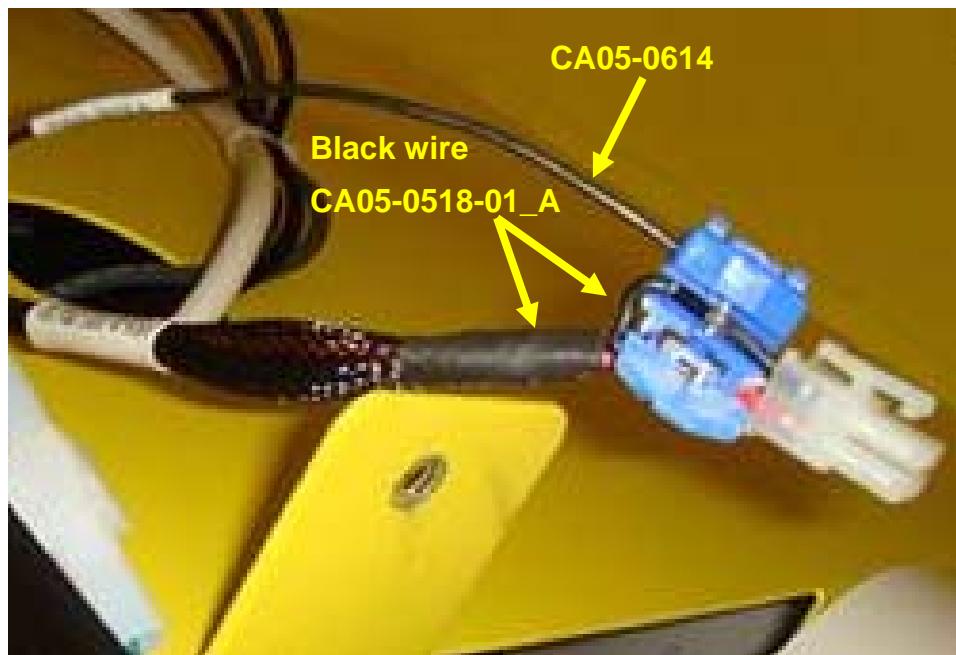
Routing the Exposed Printer Cable through the Blue Cable Clamp
